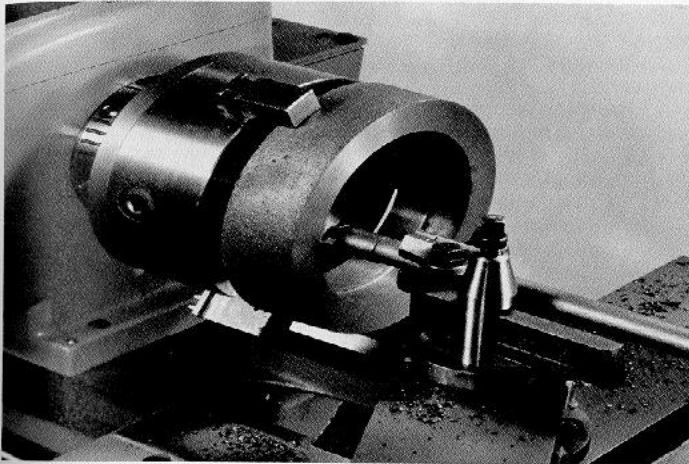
Boring or machining internal surfaces is sometimes done on lathe.
